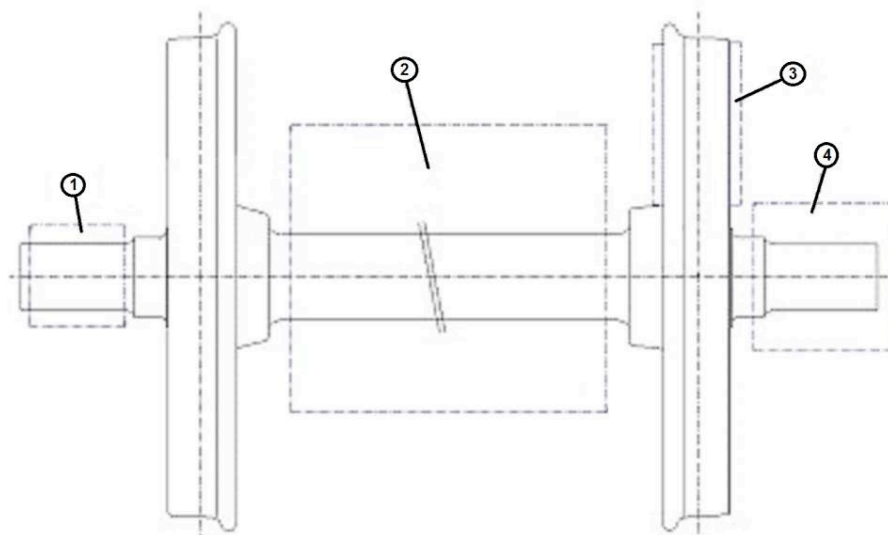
Wheelset. Other components: (1) Bearings, (2) Brake disc, transmission or final drive, (3) Wheel-mounted brake disc, (4) Axle box with bearings
